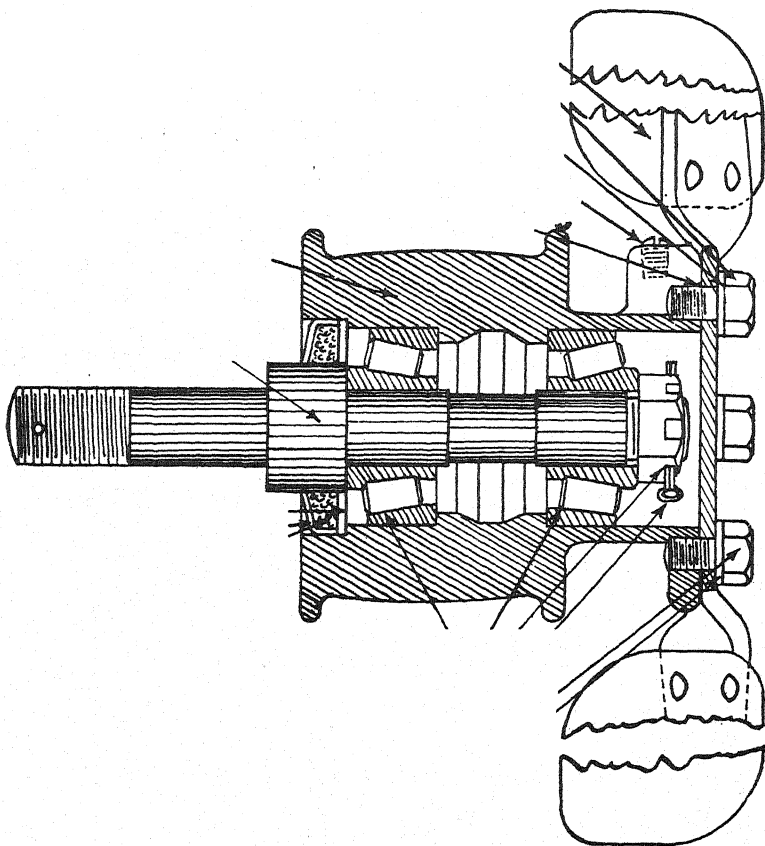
Threaded nut adjustment of bearings on fan shaft.
